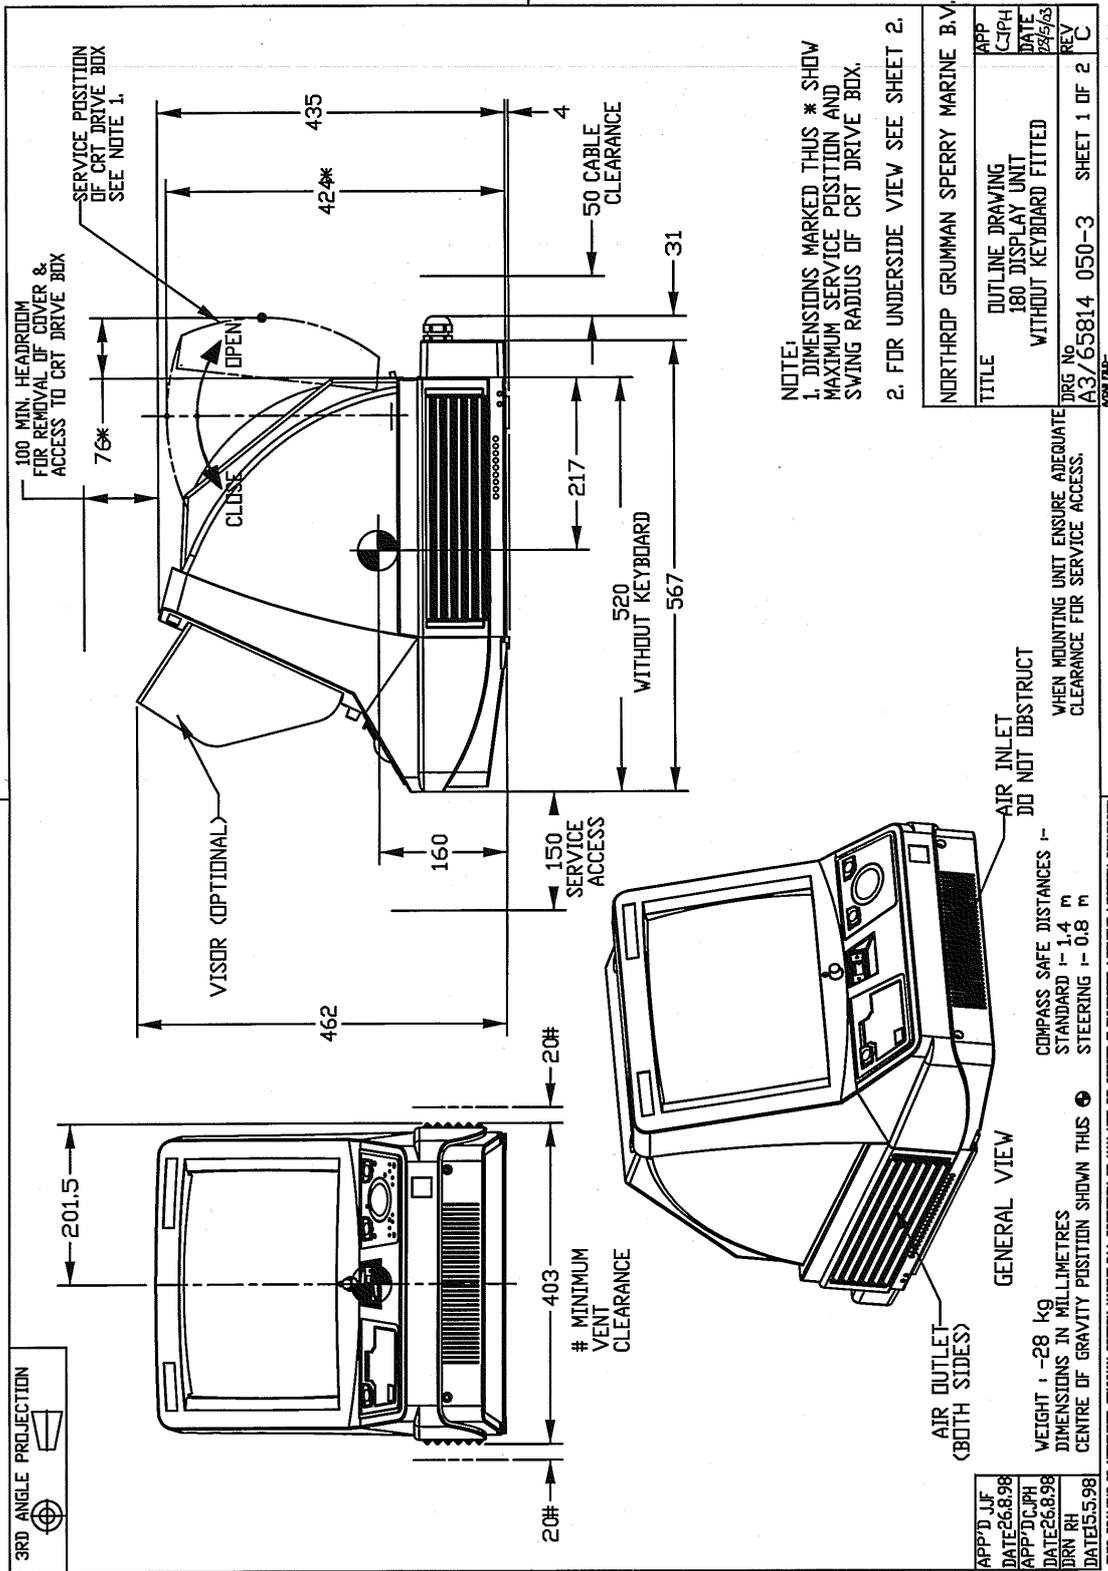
180 Display Unit (CRT) Outline Drawing
